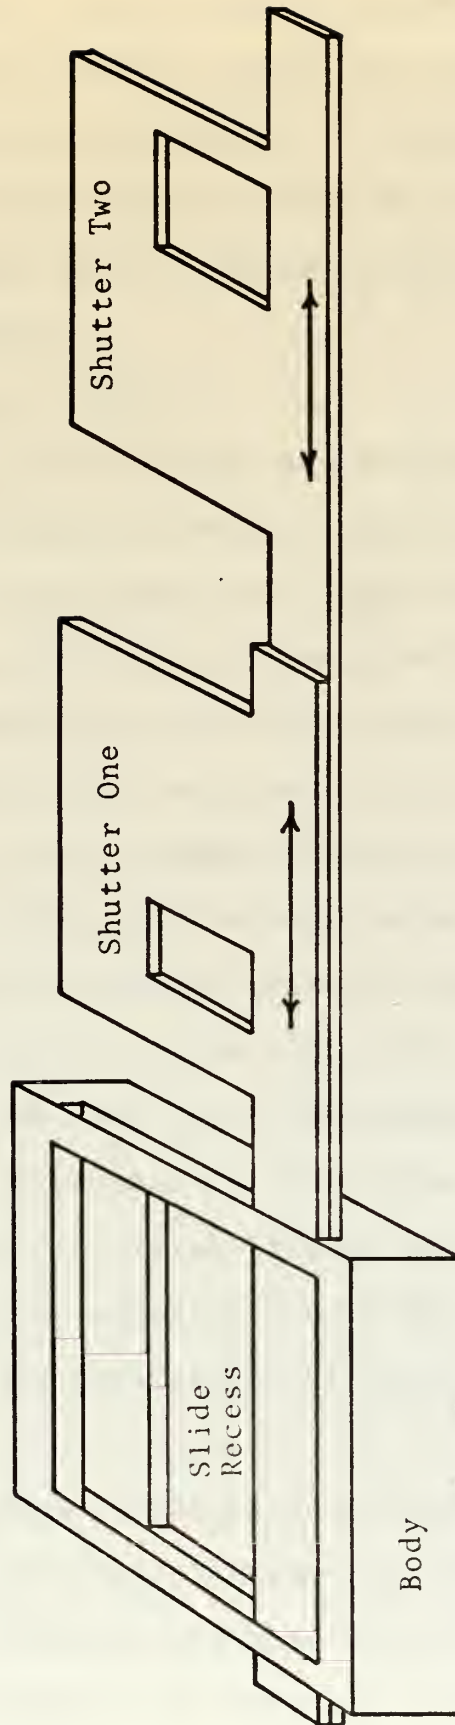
Dual-shutter slide holder with shutter removed from body for detailed viewing. Each shutter moves independently.
